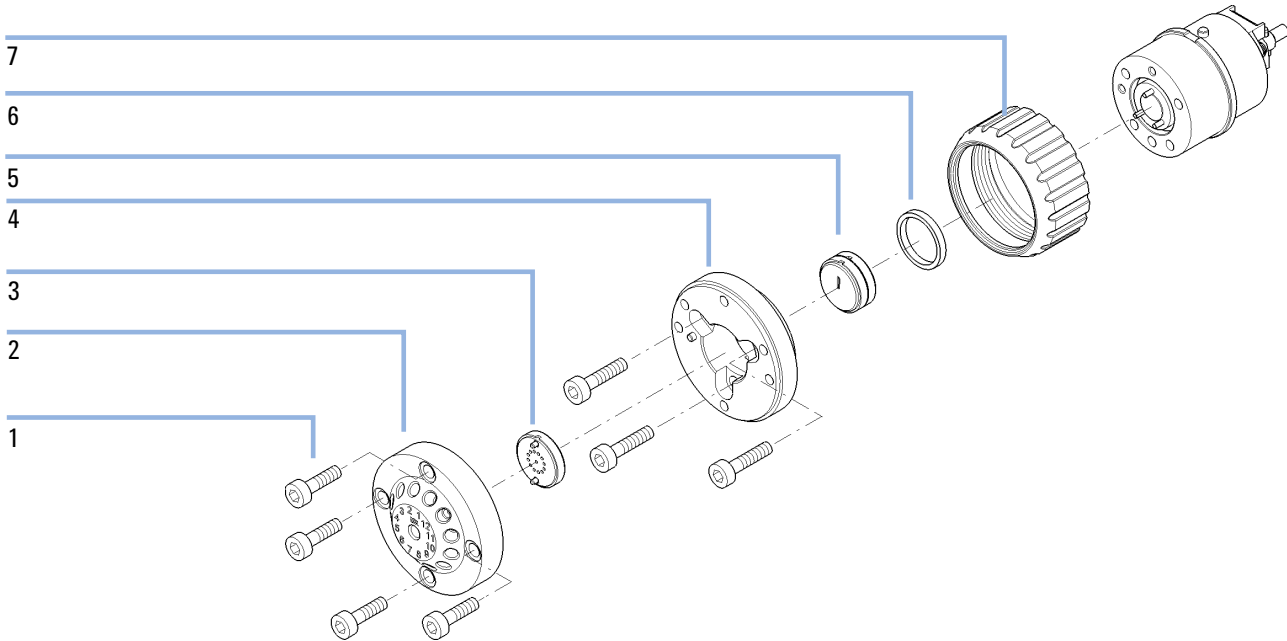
Valve Head Parts (example shows a 5067-4159 valve head)
